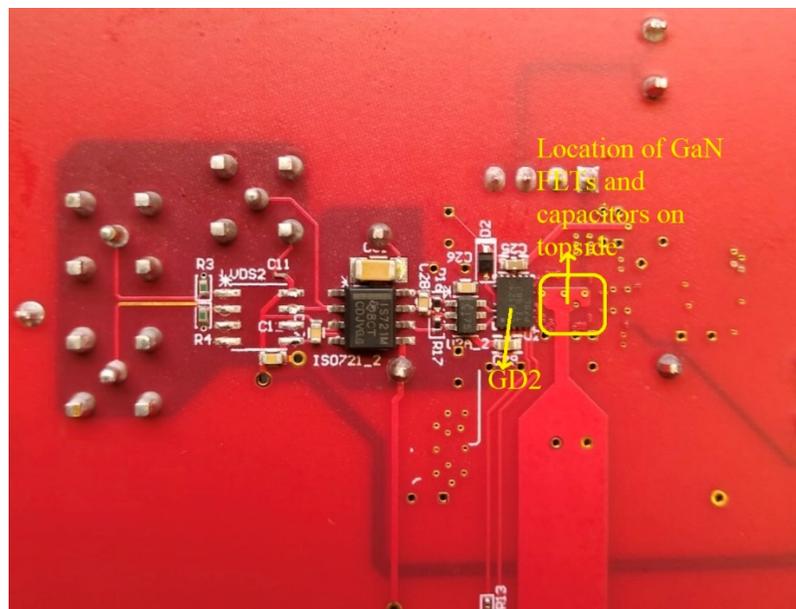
Bottom side of the prototype PCB to verify the proposed gate driving technique.
